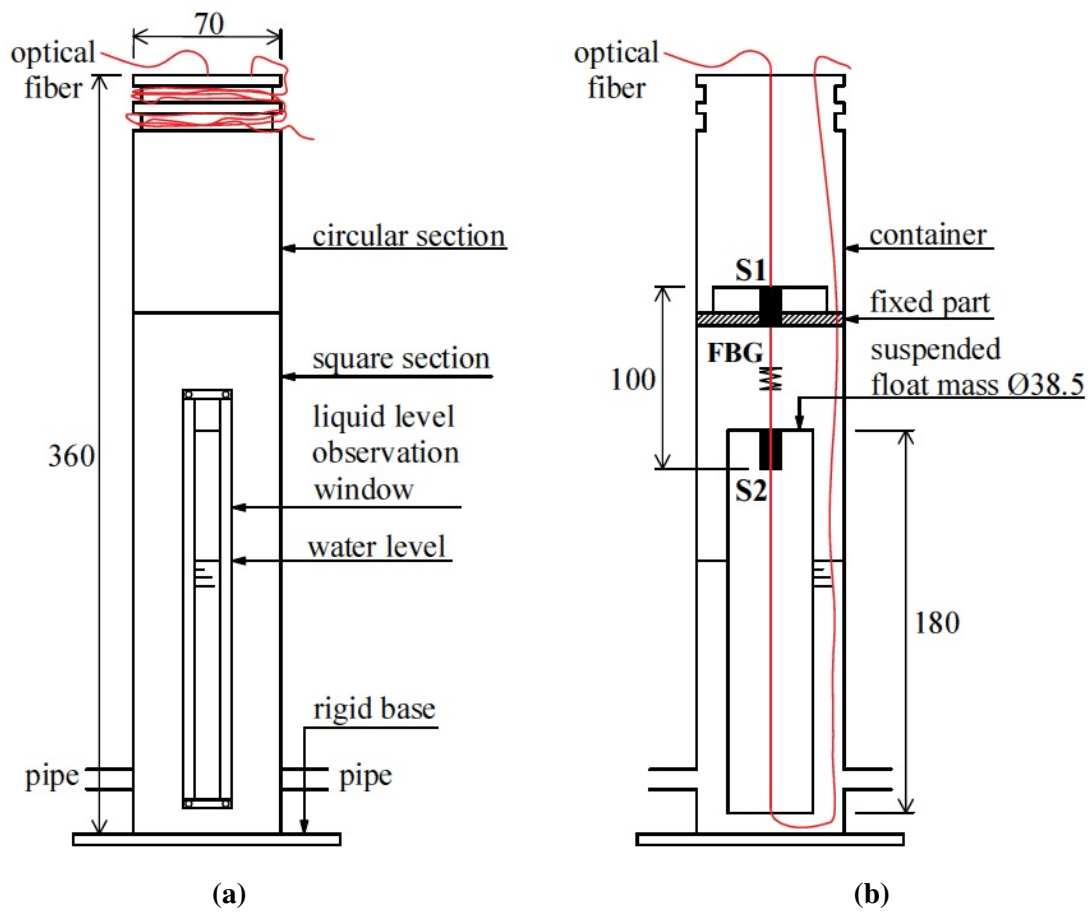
(a) External view and (b) internal system layout of the employed FBG-DSM sensor (dimensions in mm).
